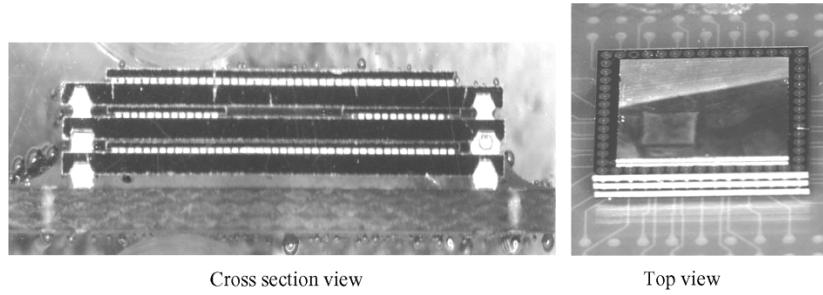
Cross-sectional view of the 3-D stacked module using silicon carrier with through-hole interconnects.
